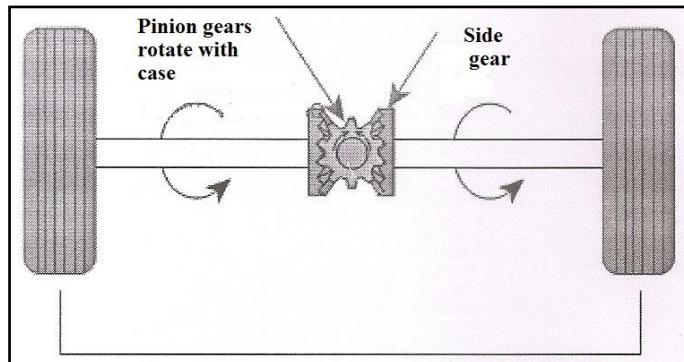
Position of pinion gears in the case causes the side gears to rotate
